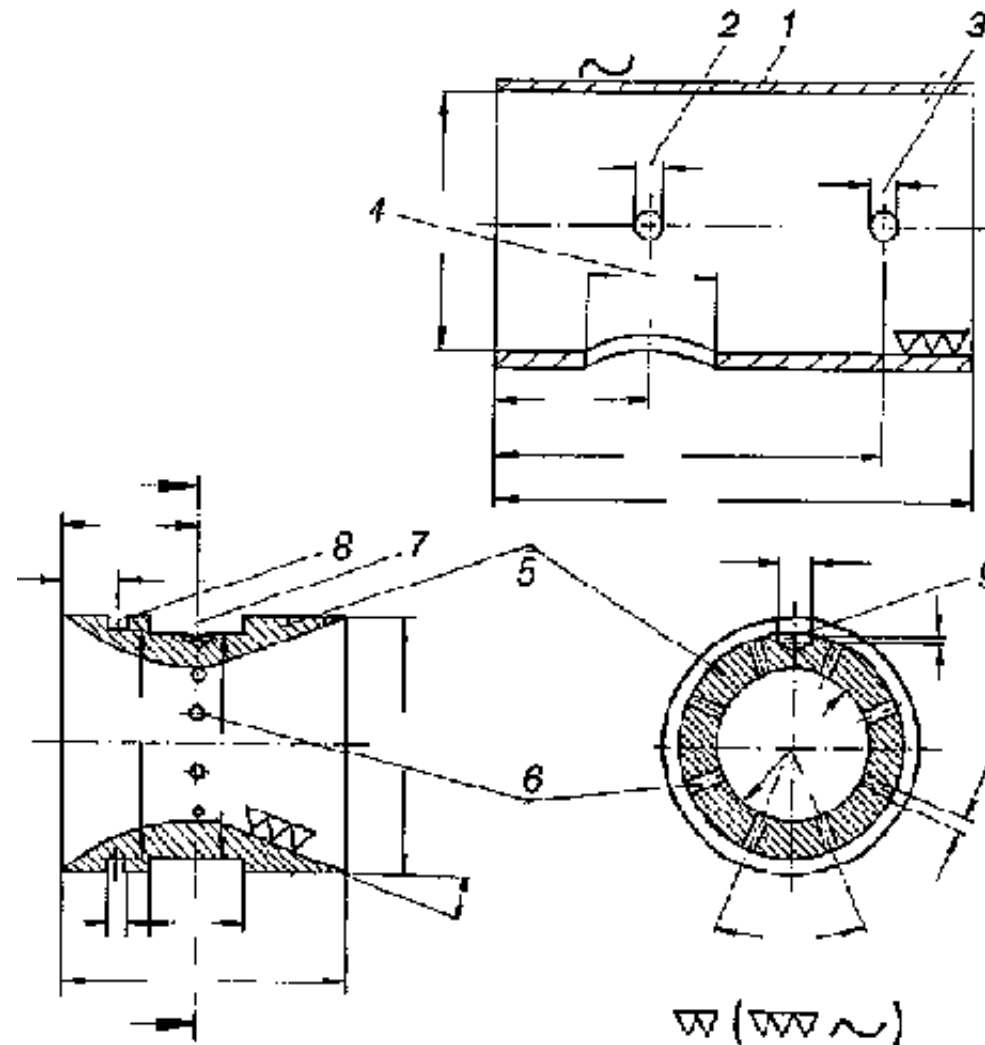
Venturi mixer parts 1 Mixer body (tube), 2 Bore for venturi ring holder bolt, 3 Bore for butterfly valve shaft, 4 Bore for gas supply pipe connection (brazed, welded), 5 Venturi ring, 6 Calibrated bores for gas inlet, 7 Gas supply ring channel, 8 Groove for seal ring (O-ring), 9 Bore for venturi ring holder bolt; all dimensions according to calculations and engine inlet size (refer to Chapter 6).
